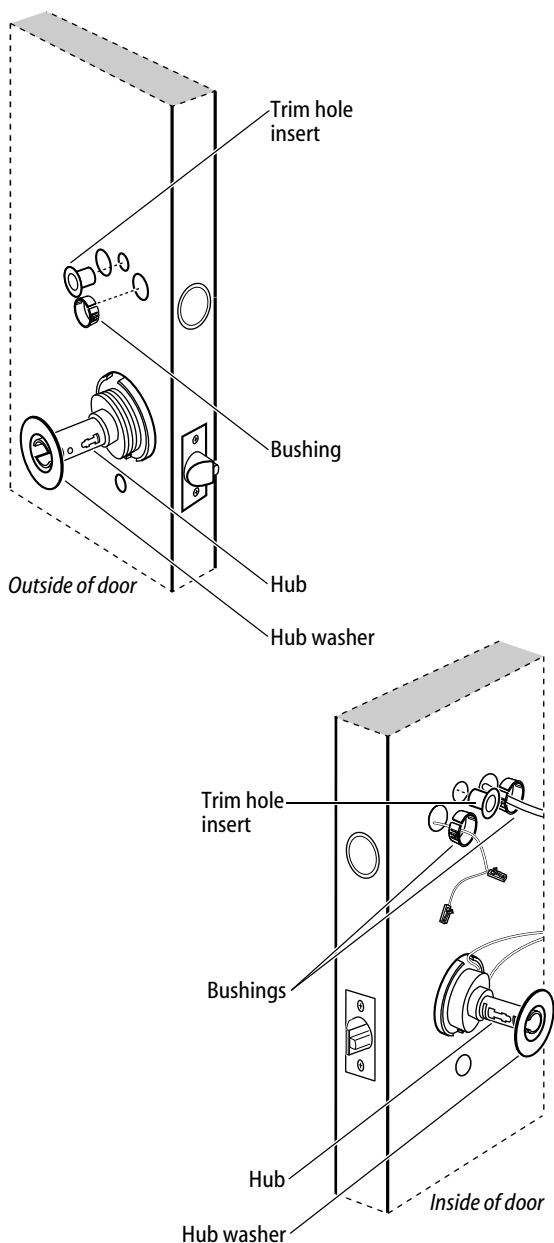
Installing the trim hole inserts, bushings, and hub washers
